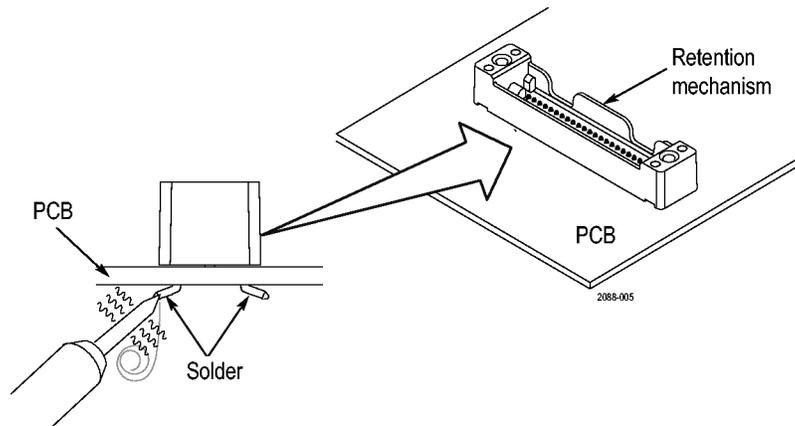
Soldering the anchoring posts to the circuit board (PCB)
